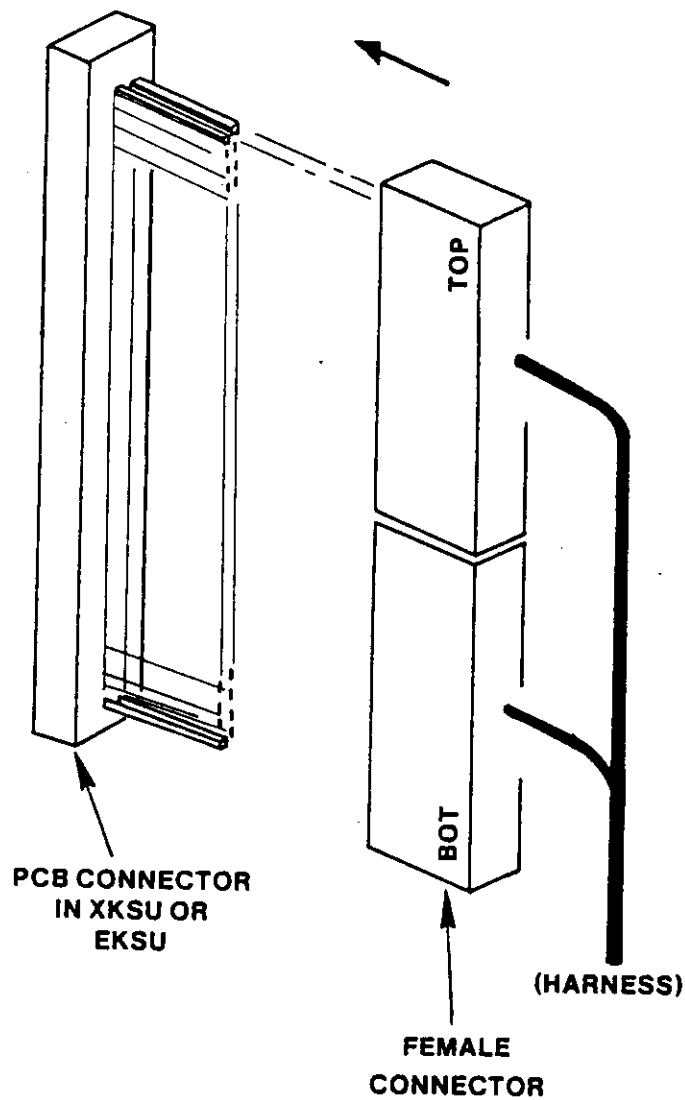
XCBL CABLE ASSEMBLY PLUG CONNECTION
